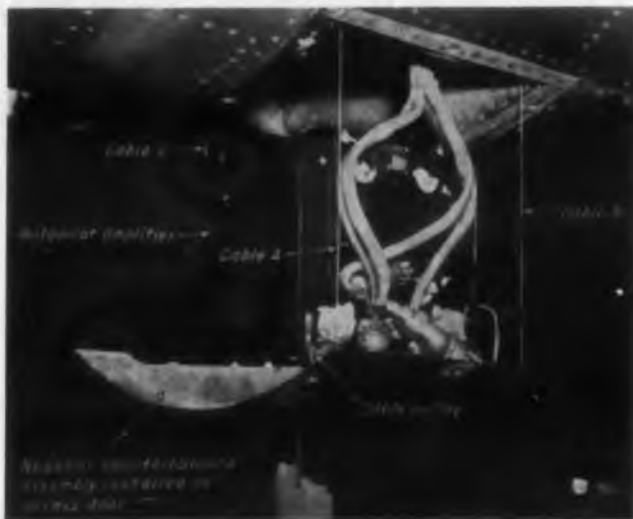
Neg'ator assembly counterbalances 36-lb assembly in Republic's F-84G Thunderjet.
